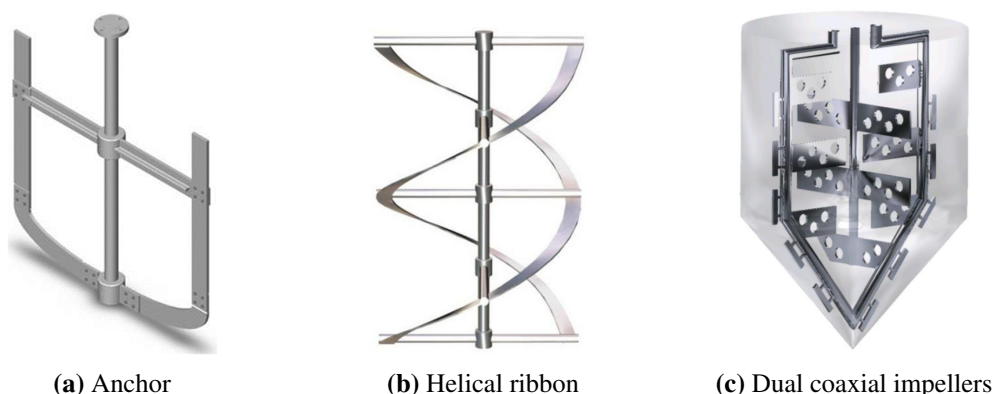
Examples of close-clearance impellers with , (a) Anchor impeller, (b) helical ribbon impeller and, (c) Dual impeller for toothpaste manufacturing constituted by one central, multi-paddles impeller and a secondary scraper (Cortada Garcia, 2018).
